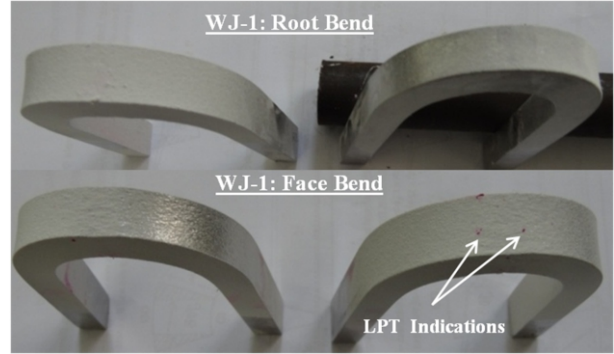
Photograph of bend tested specimens of Alloy 617M welded tube
